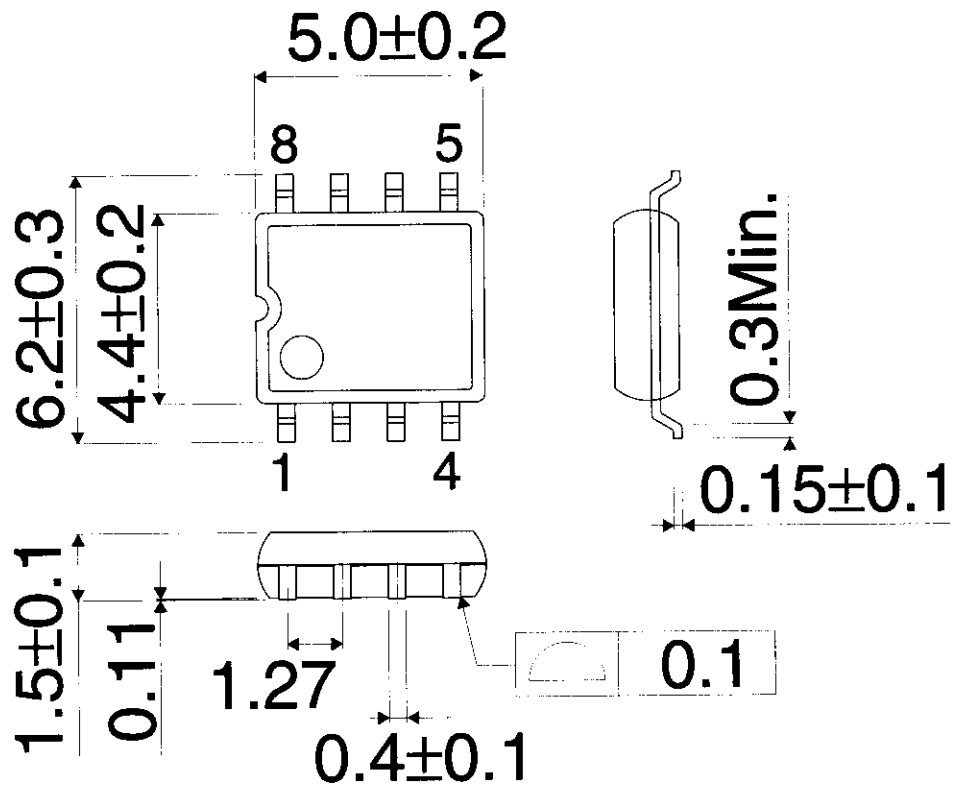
Outline Dimensions SOP8(BR93L66RF-W)
